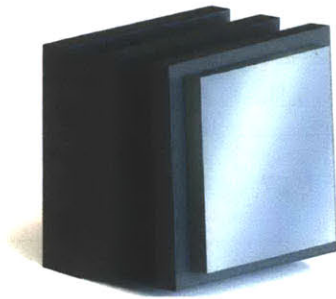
CAD model of flexural design with EDM manufacturing method
